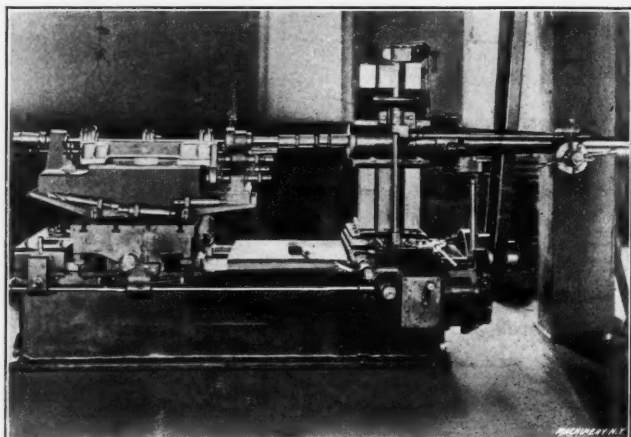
Fosdick Boring Mill at work on a Crank Case
